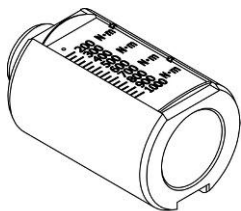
Scale adjustment for adjusting type torque wrench (whole)
